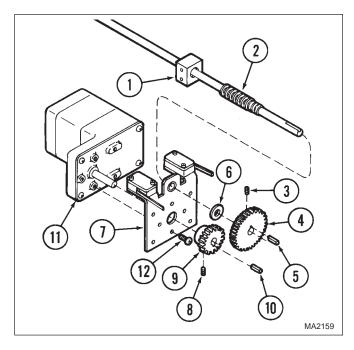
Lateral Tilt Drive Assembly Disassembly
